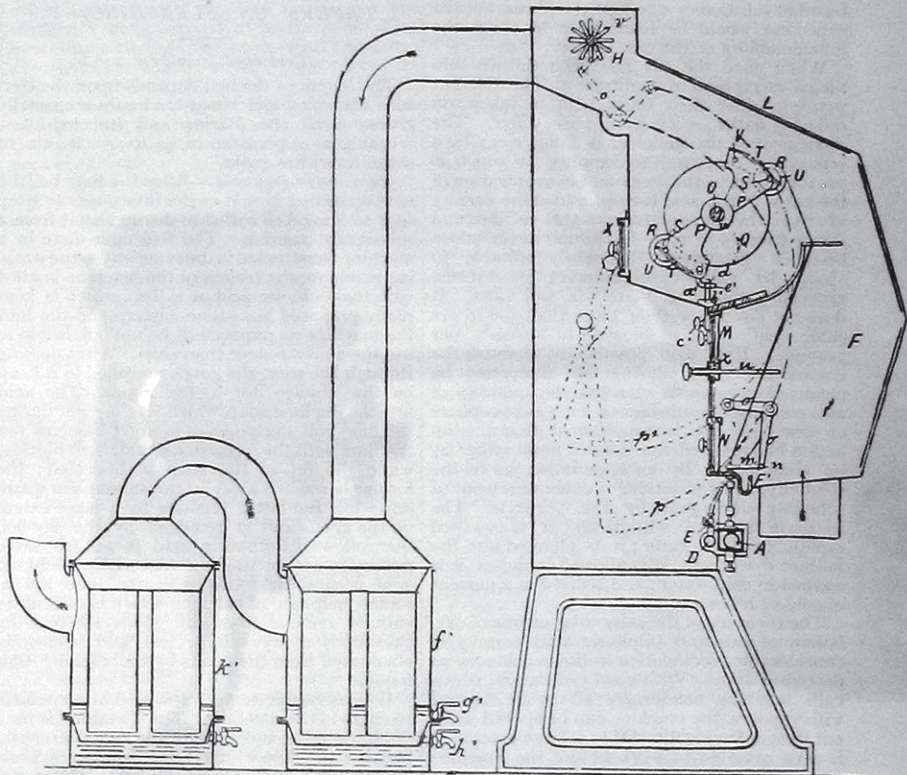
CROSS SECTION; WITH ATTACHMENTS.
